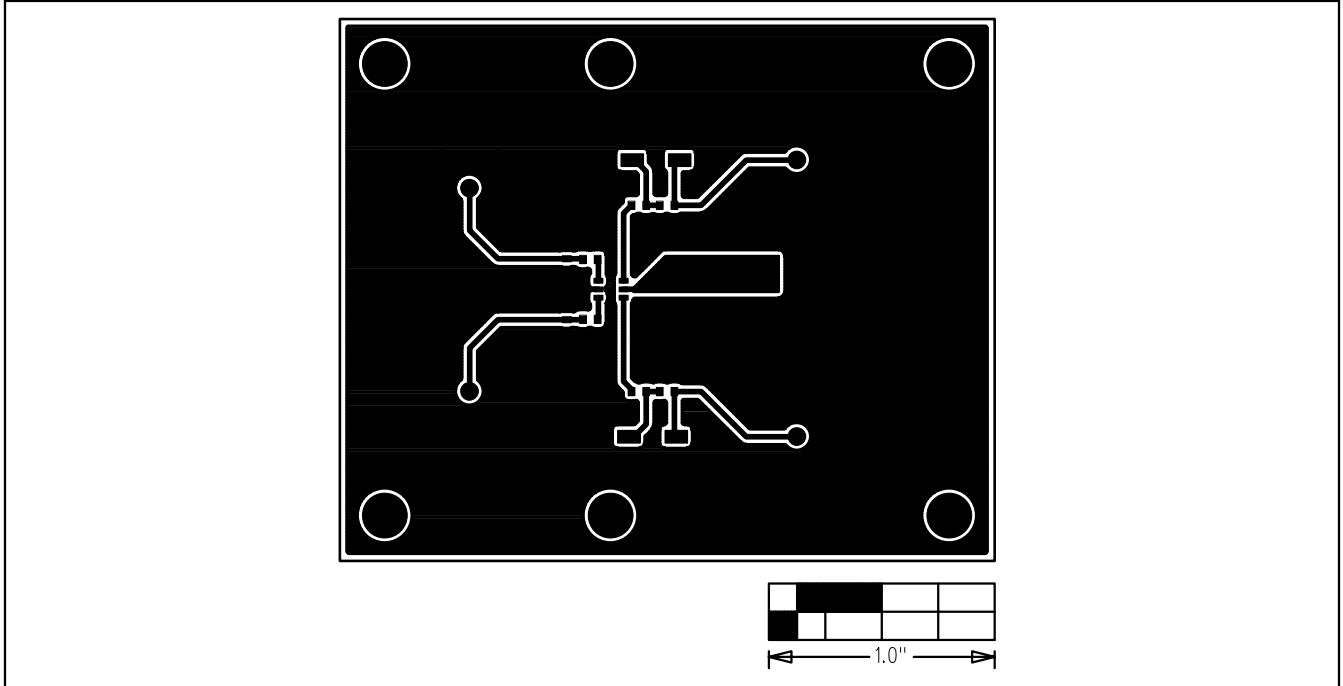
MAX9587 EV Kit PCB Layout—Component Side
